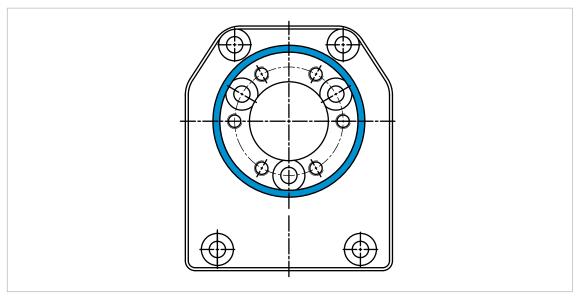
Front view of the motor flange A-side with radial groove (blue)
